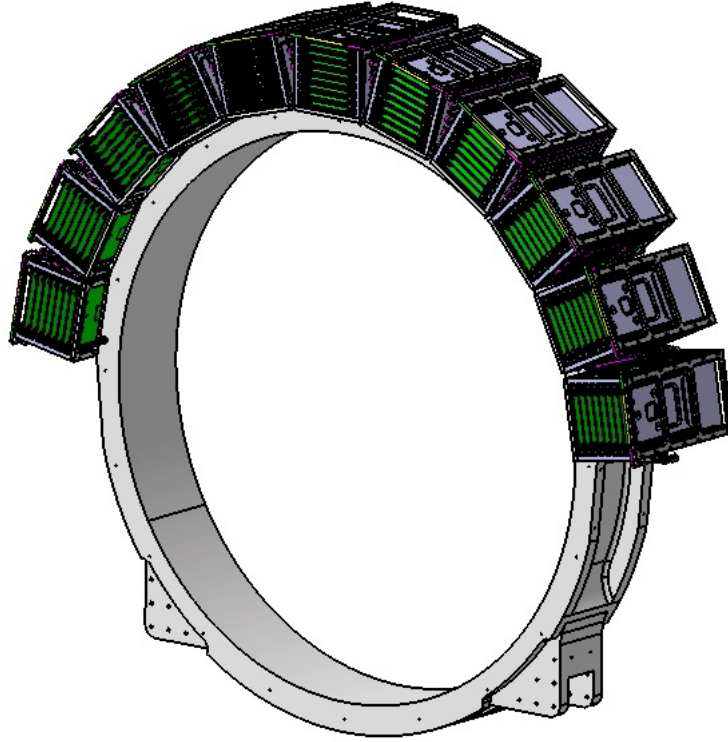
Completed view of the aluminum disk with the fully assembled DAQ cooling system.
